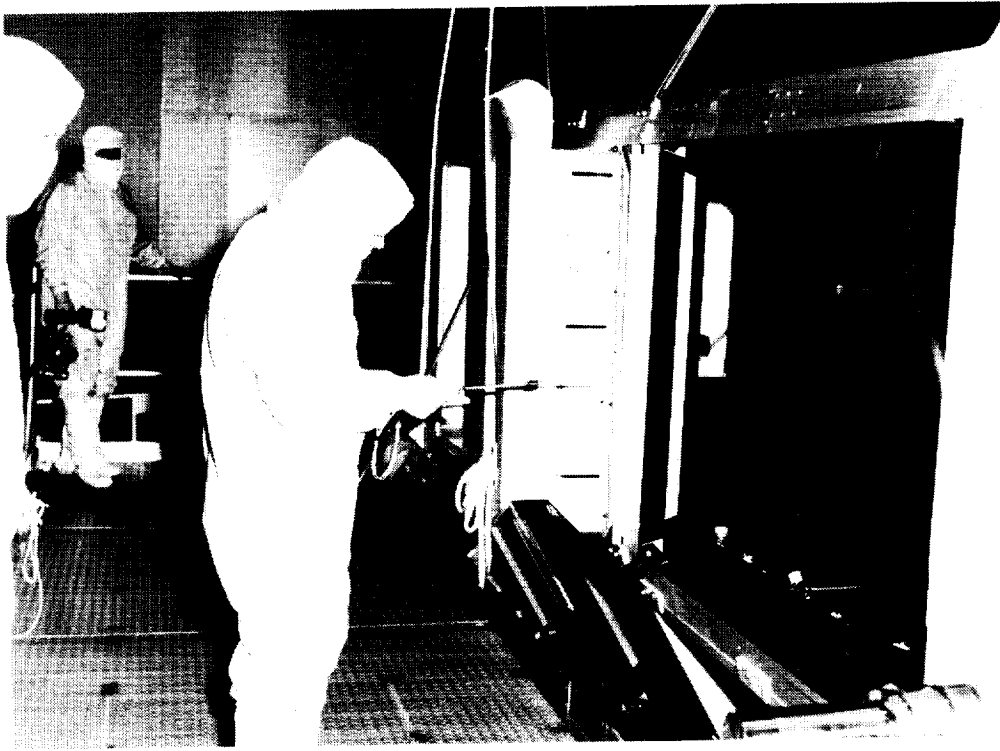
Tray lifting fixture being attached to tray flange. (Photo L-90-03089)
